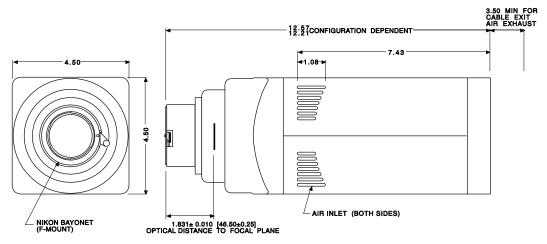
Outline Drawing: PI-MAX/PI-MAX2 with F-mount Adapter
